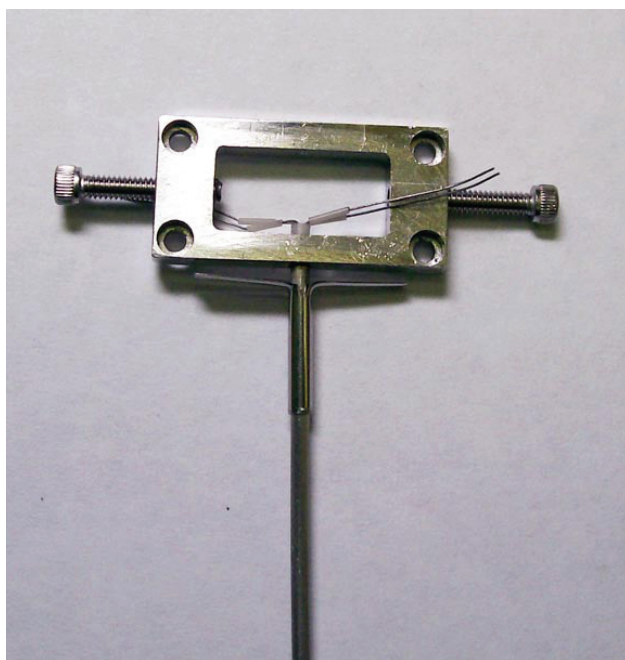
The lead wire assembly is fed through the hole in the the inconel housing (top face shown). By convention, the “top” thermocouple pair is on the right when viewing the sensor housing top face.
